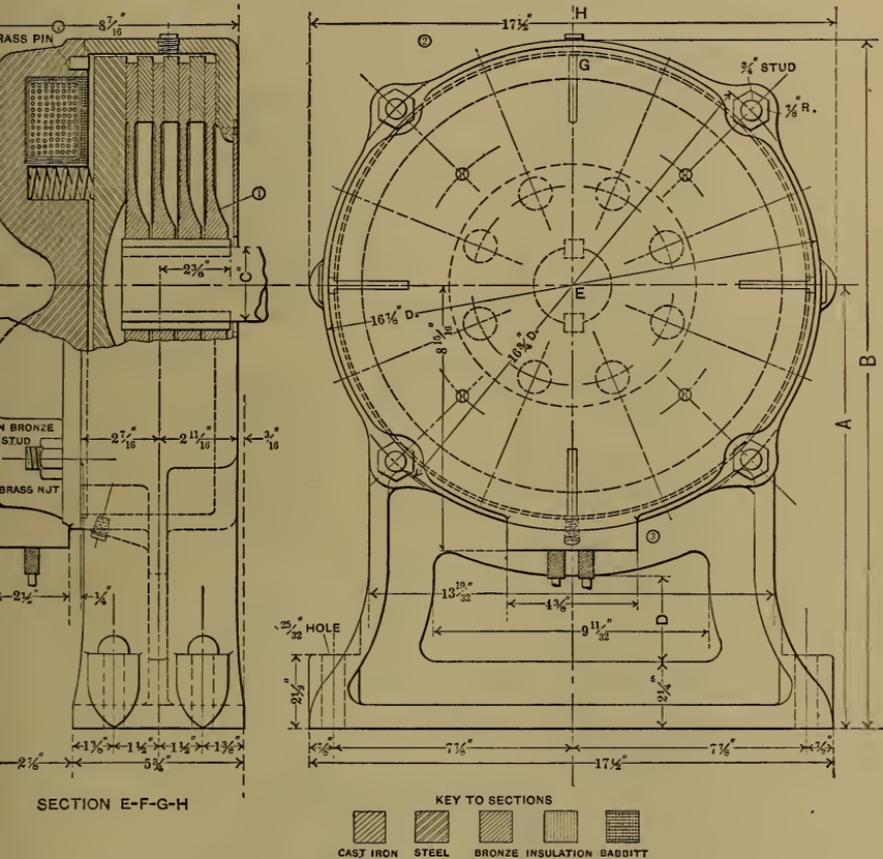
ED-108, Form A Disk Brake. Gen. Elec. Co.
